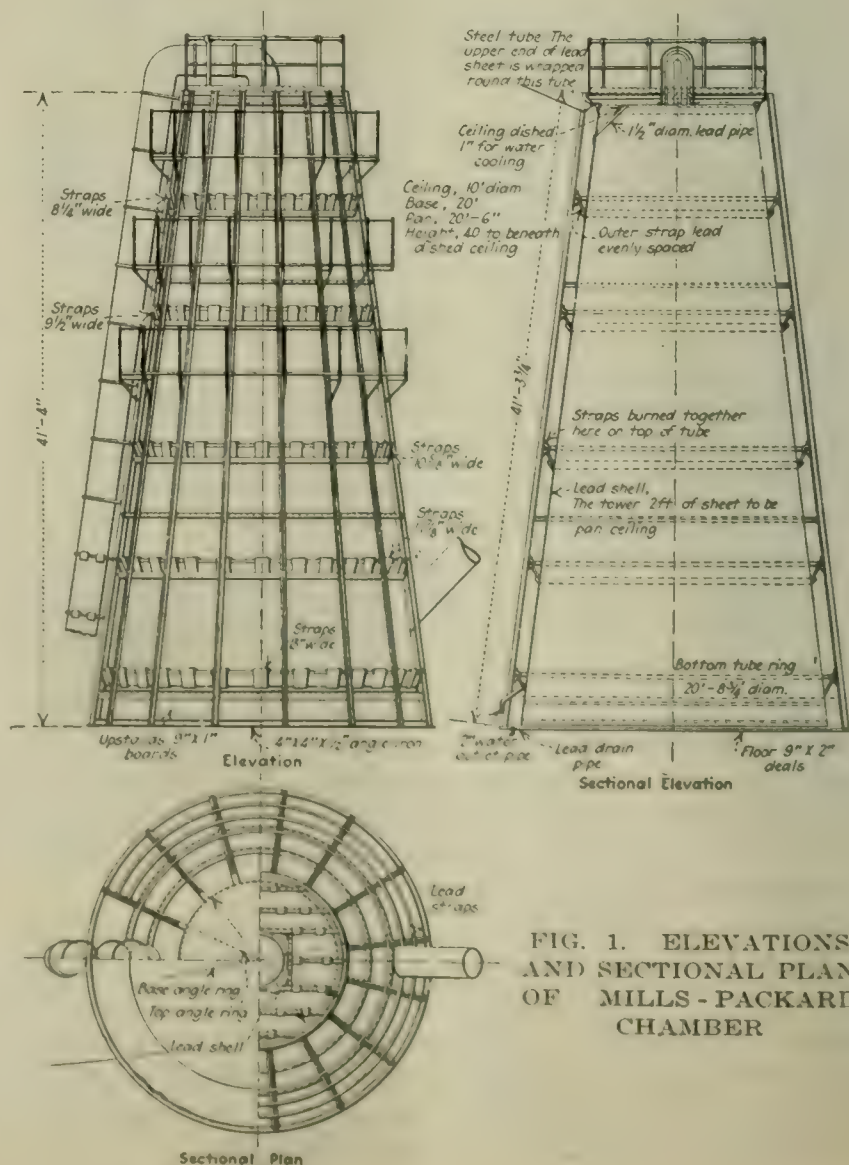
ELEVATIONS AND SECTIONAL PLAN OF MILLS-PACKARD CHAMBER
